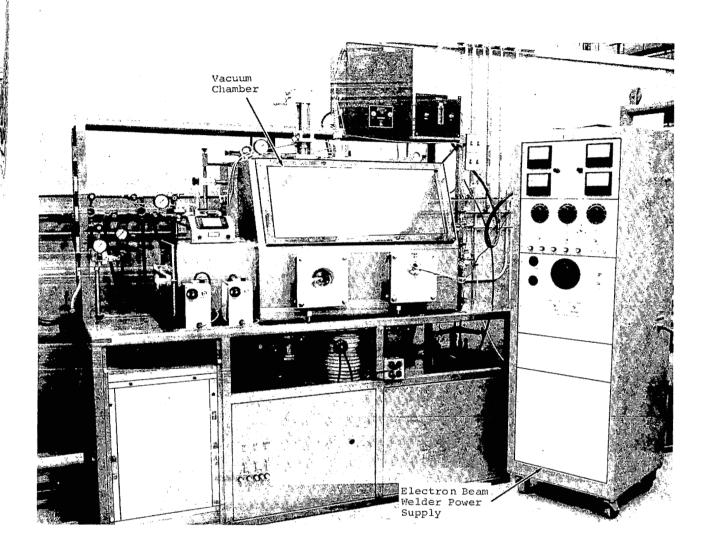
Vacuum Chamber and Power Supply for Capsule Loading and Welding
